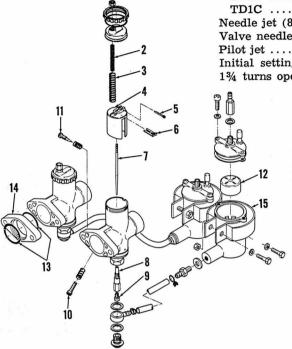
Exploded view of Mikuni VM 276 carburetors and float bowls.
